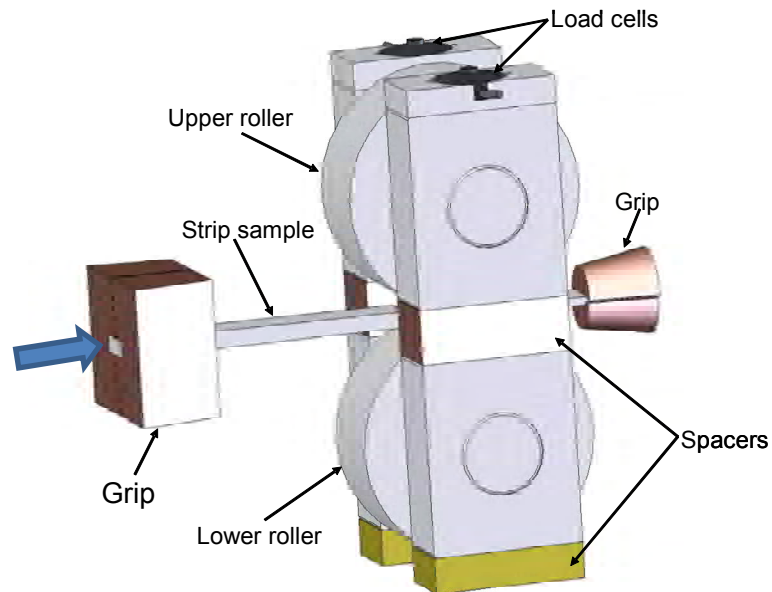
LST mill assembled in the Gleeble 3500 chamber.
